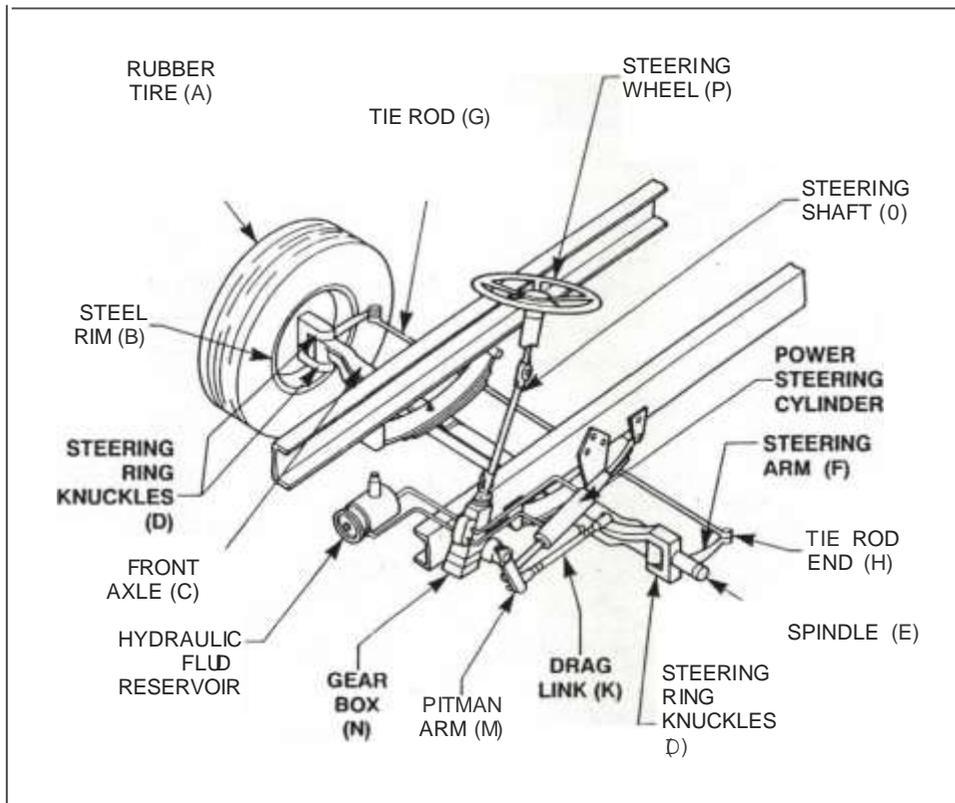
The Steering System is composed of rubber tire (A), steel rim (B), front axle (C), steering ring knuckles (D), spindle, (E) steering arm (F), tie rod (or cross-tube) (G), tie rod end (H), drag link (K), pitman arm (M), gear box (N), steering shaft (O), steering wheel (P).
